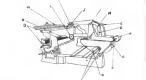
MACHINE FOR ROUGHING PROPELLERS WITH MOTOR AND BELT DRIVE. THIS MACHINE, LIKE THAT SHOWN IN FIG. 2, IS A FORM OF ROUTER AND IS MANIPULATED ENTIRELY BY HAND. THE SECOND DRIVING MECHANISM IS THE SHAFT OF THE DRIVEN.
